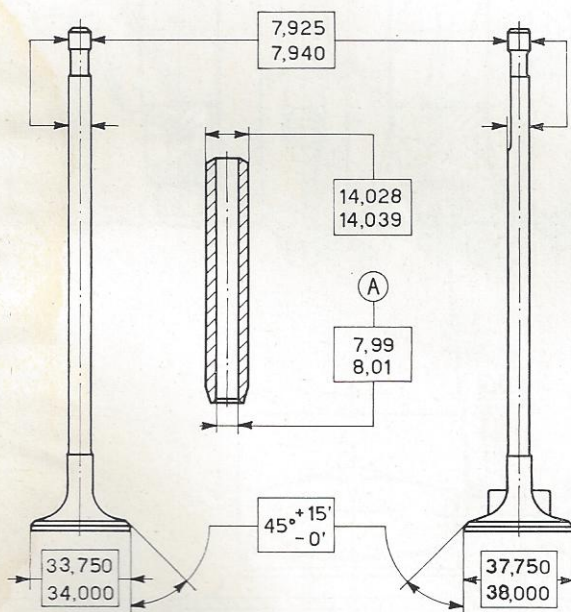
/8. - Standard dimensions of valves and guides (engine mod. C01D/55).
